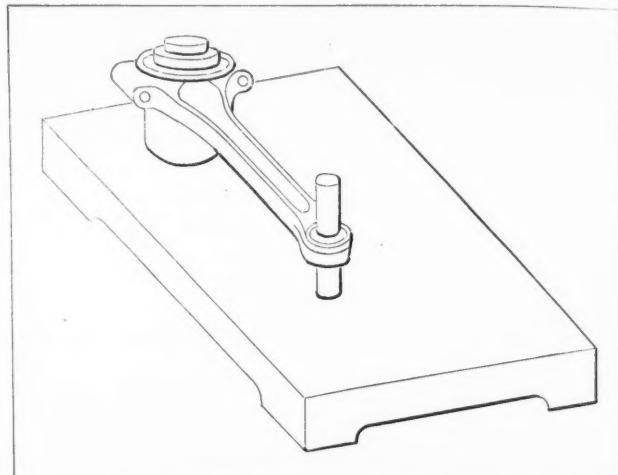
Set-up for Checking Bores of Connecting-rods with Gage Shown in Fig. 1
